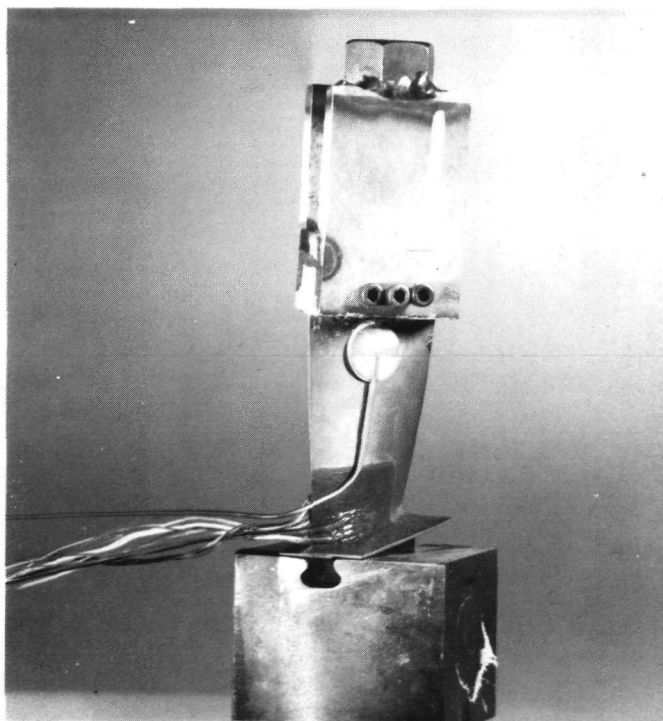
Titanium Test Specimen With Fixtures for Tensile Test, Without Heating Tape (77-441-9586-B)
